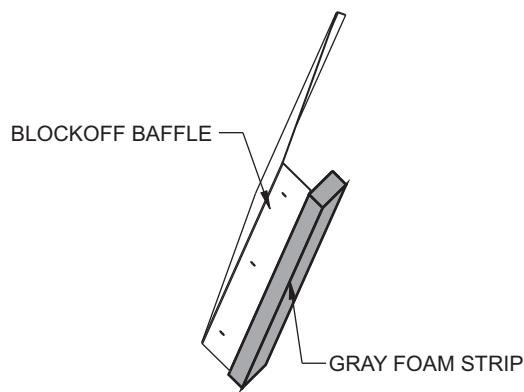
Adding Foam Strip to Block-Off Baffle
